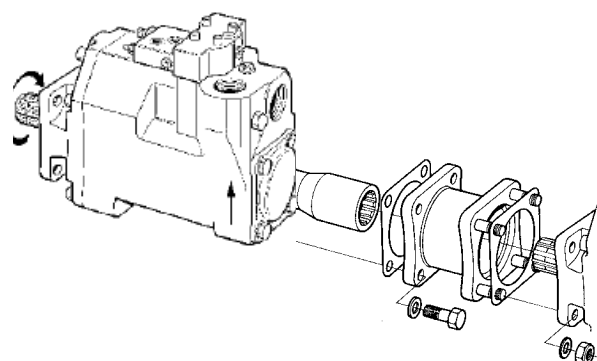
Adaptor kit (P/N 379 7795) for tandem coupling.
